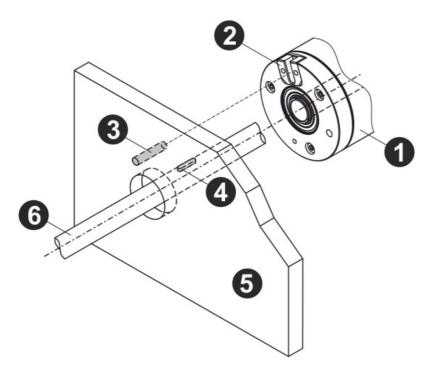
Mounting with dowel pin / groove insert, principle illustration
